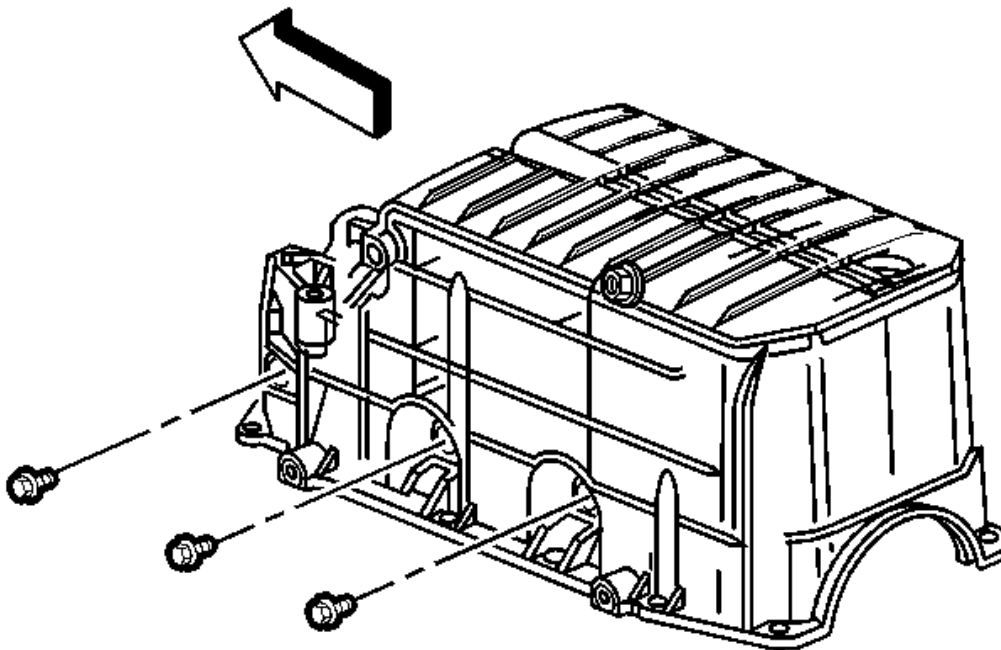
View Of Oil PanCourtesy of GENERAL MOTORS CORP.
